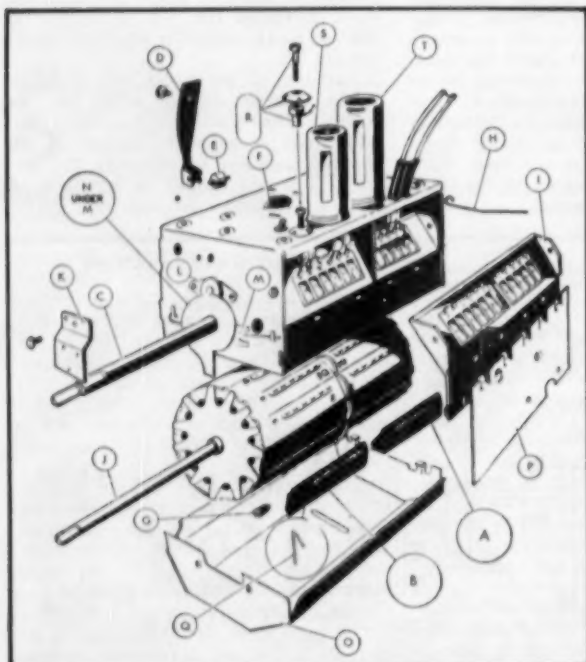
Exploded view of the Standard Coil tuner. Most of the mechanical parts shown labeled are available in the complete parts kit for replacement purposes.
